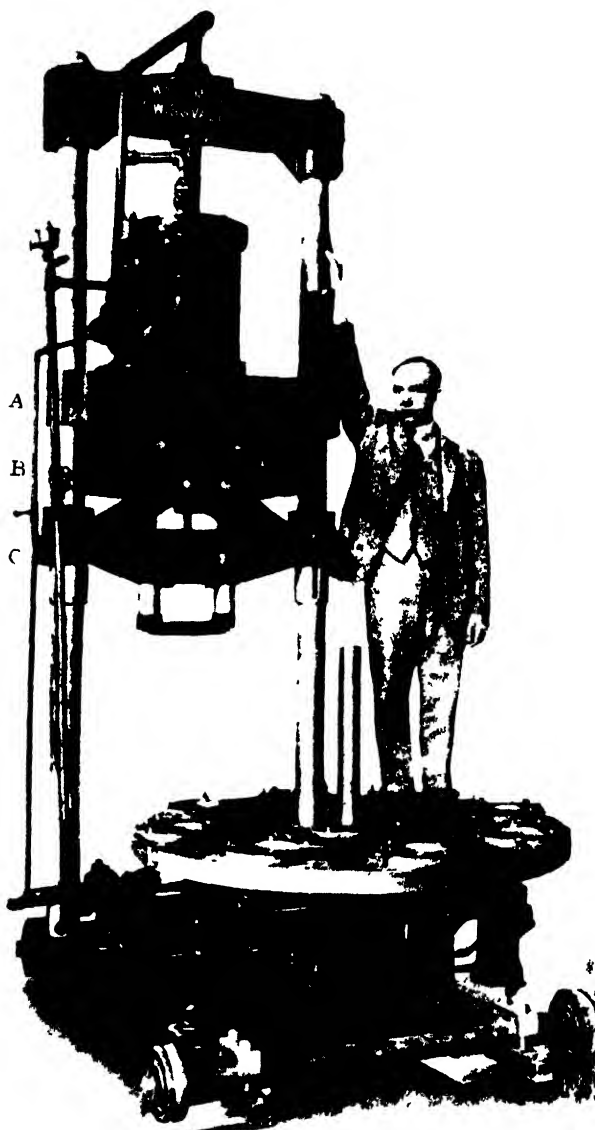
THE W. J. MILLER (MODEL AA) PRESSING MACHINE.
